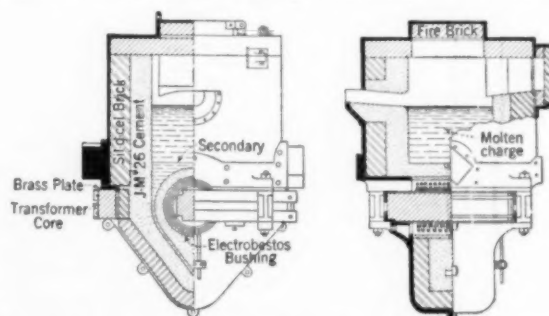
SECTIONAL VIEWS OF AJAX-WYATT ELECTRIC FURNACE
